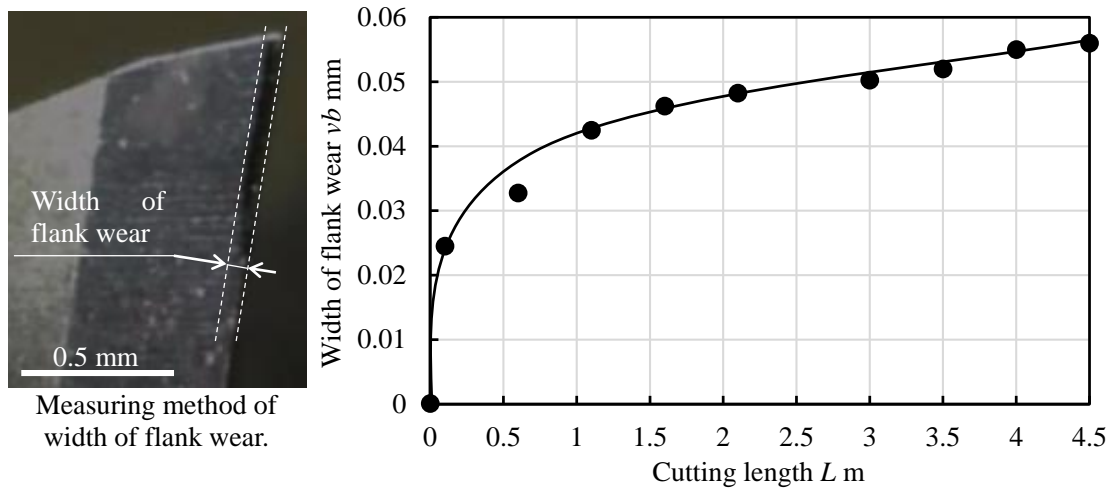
Relation between flank wear and cutting length on diamond coated end-mill.
